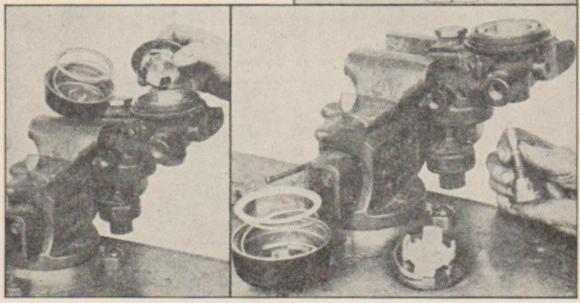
FIGURE E. REMOVING FIGURE F. REMOVING INTAKE 38 VALVE GUIDE RING
